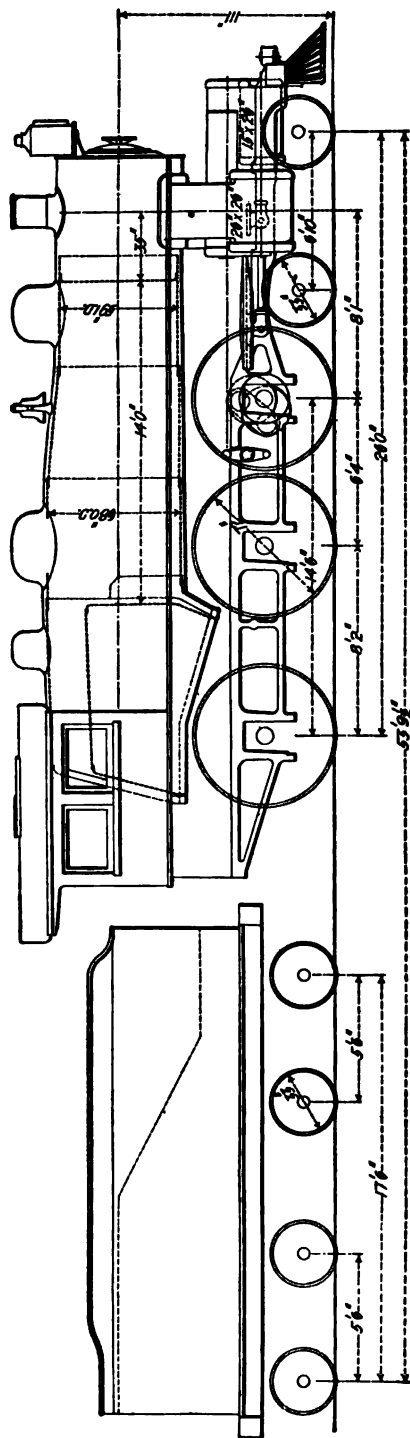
Design of Ten-wheel Type, Balanced Compound.
